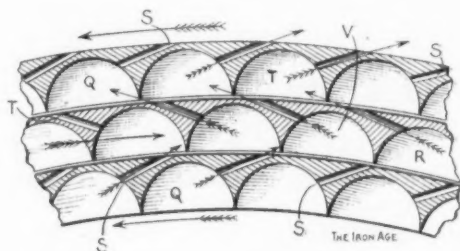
Section through Expansion Chambers and Steam Passages.
